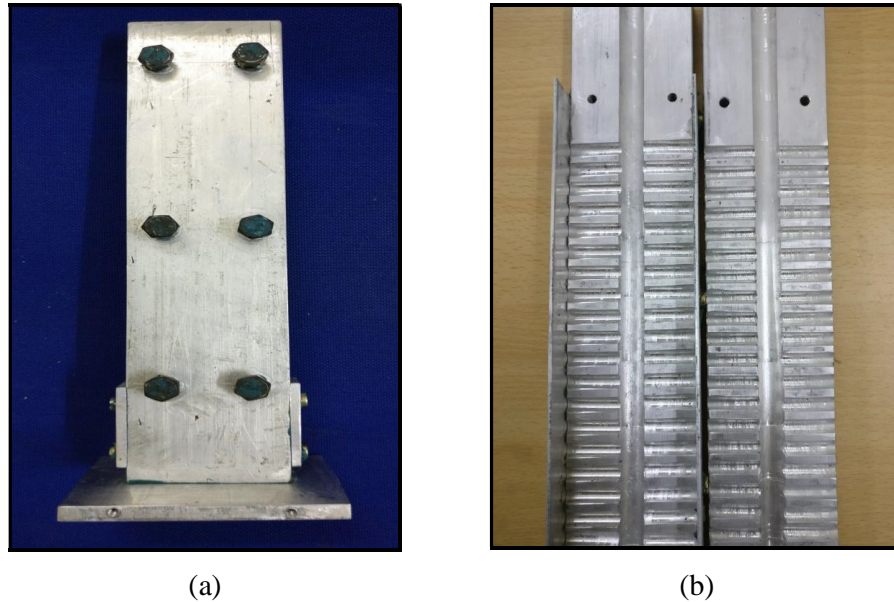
Aluminium mould in (a) closed position and (b) open positions with branches at 90° on flagella
